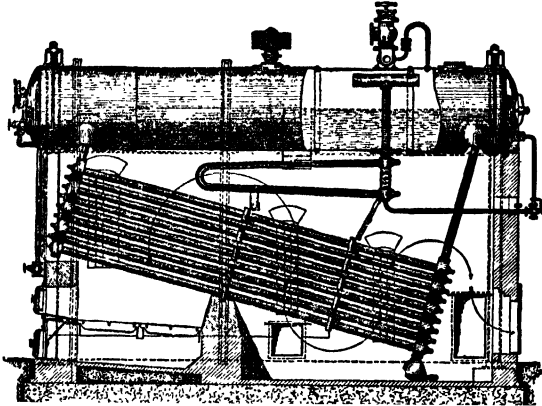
Babcock & Wilcox Water-tube Boiler fitted with Superheaters.
